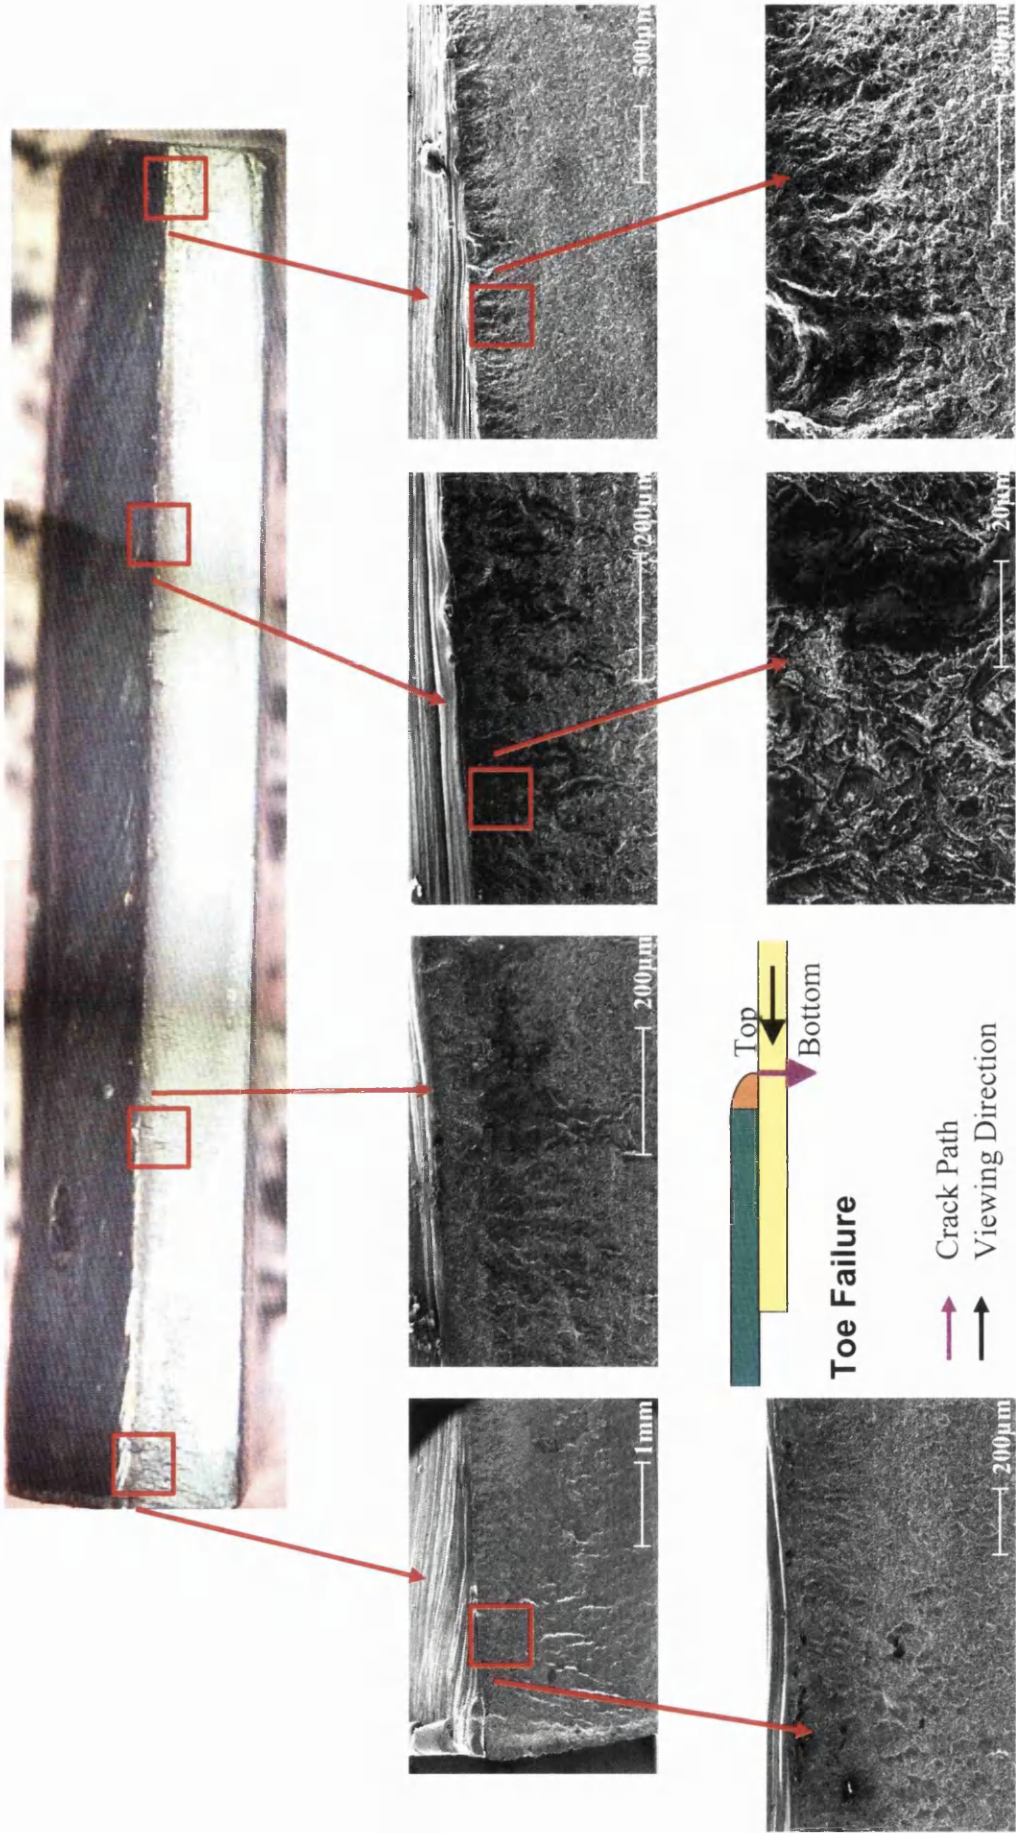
Typical Fracture Surface for R-Ratio $R=0.5$ TM11B Weld Toe Failure – Weld View
